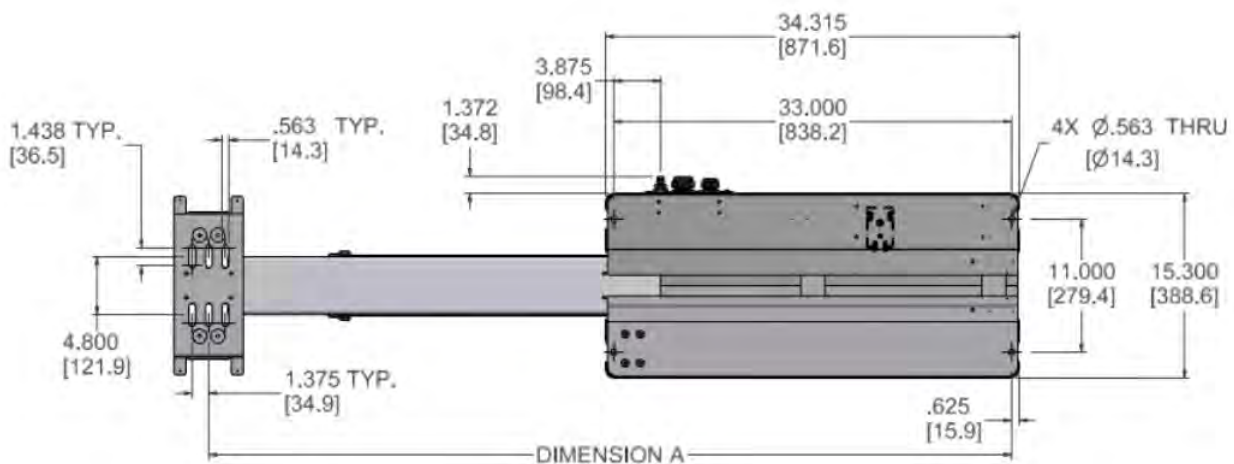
Installation Dimensions (Bottom View) Inches [mm]
